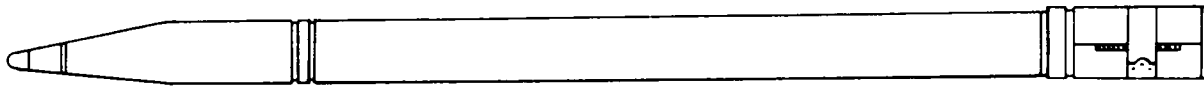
2.75-Inch Rocket Motor Mk 66 Mods
